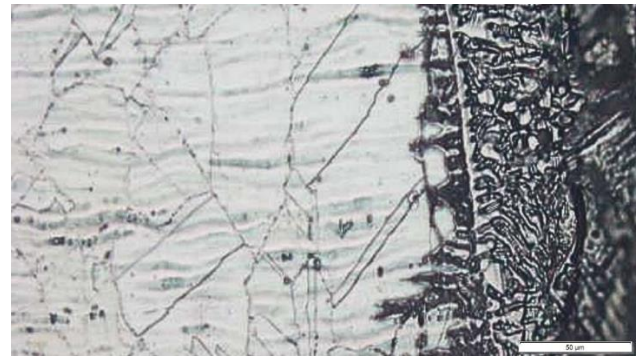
HAZ Stainless Steel 316L Filler ERNiCrMo-3
